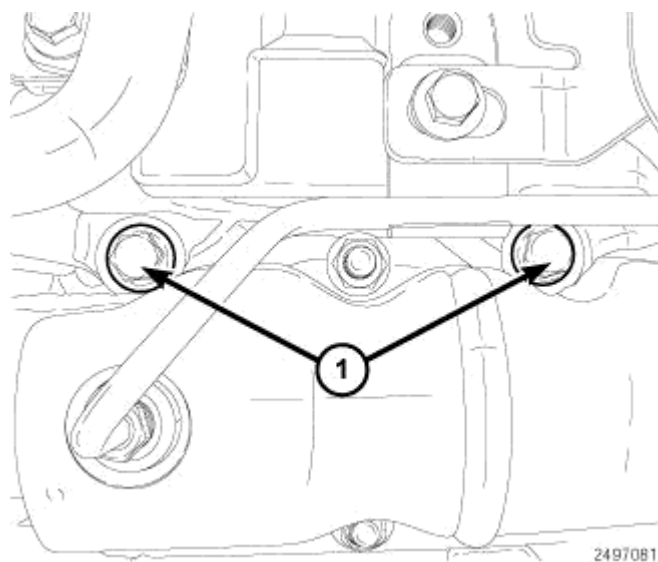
EGR Cooler Inlet Flange Nuts
